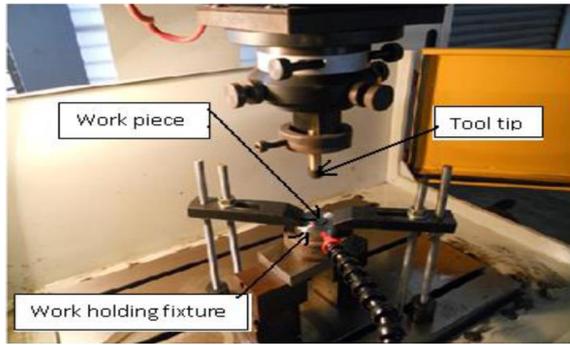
Sparkonix S25 Model Die sinking EDM Machine and experimental setup
